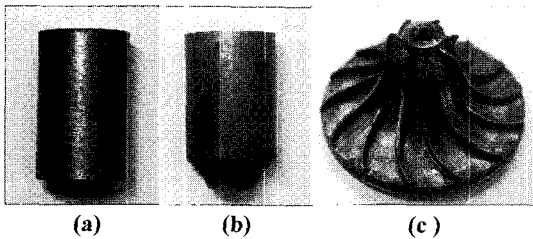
Photographs of (a) initial billet, (b) preform, and (c) forged impeller
